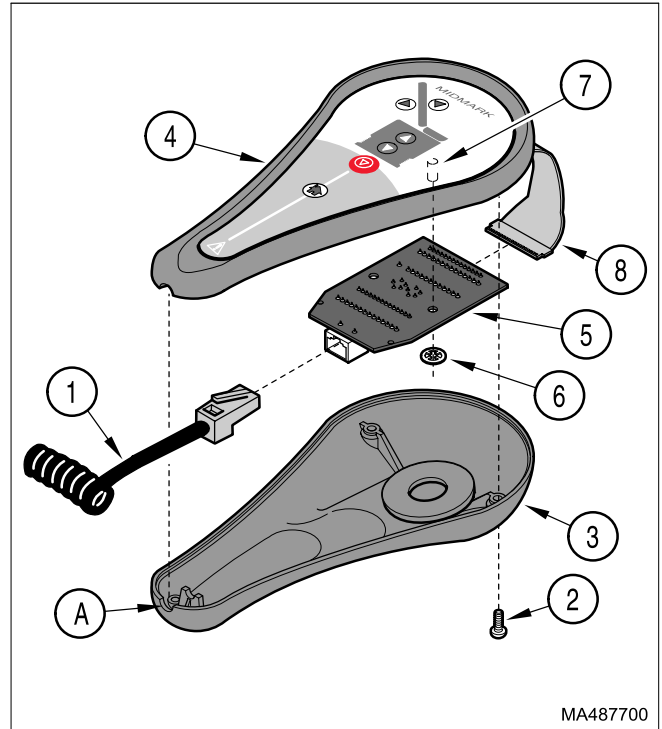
Hand Control Interface Board Removal / Installation (later units)
